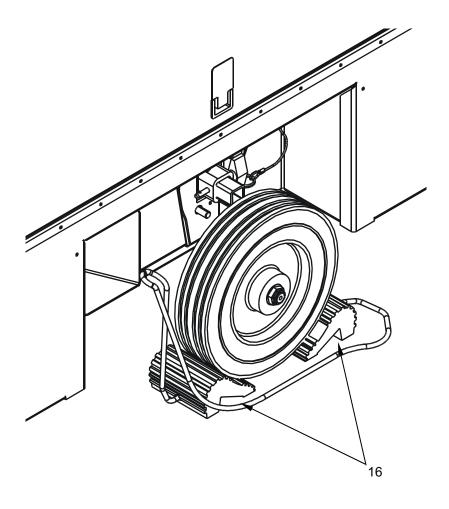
Wheel Chock Assembly (Sheet 5 of 6). 0095 00-5
